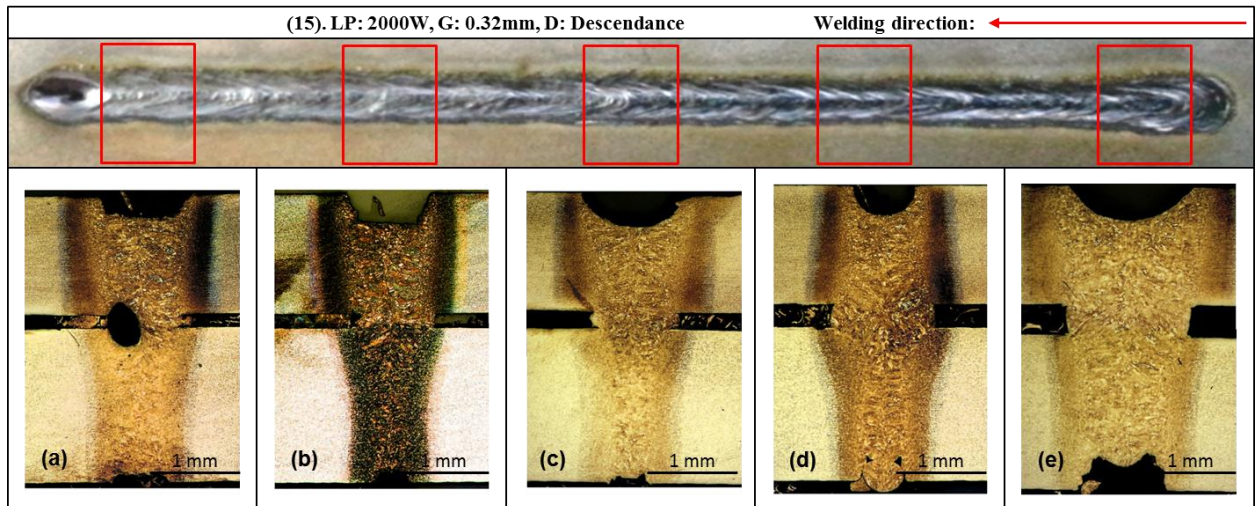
Laser Power: 2000W, Welding Speed: 2100mm/min, Gap: 0.32mm, Direction: Descendance
